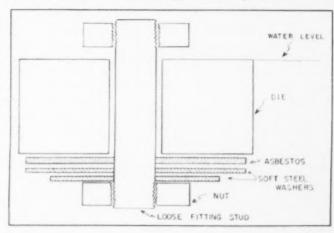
Sectional View of Apparatus for Shrinking the Bore of a Ring Die
